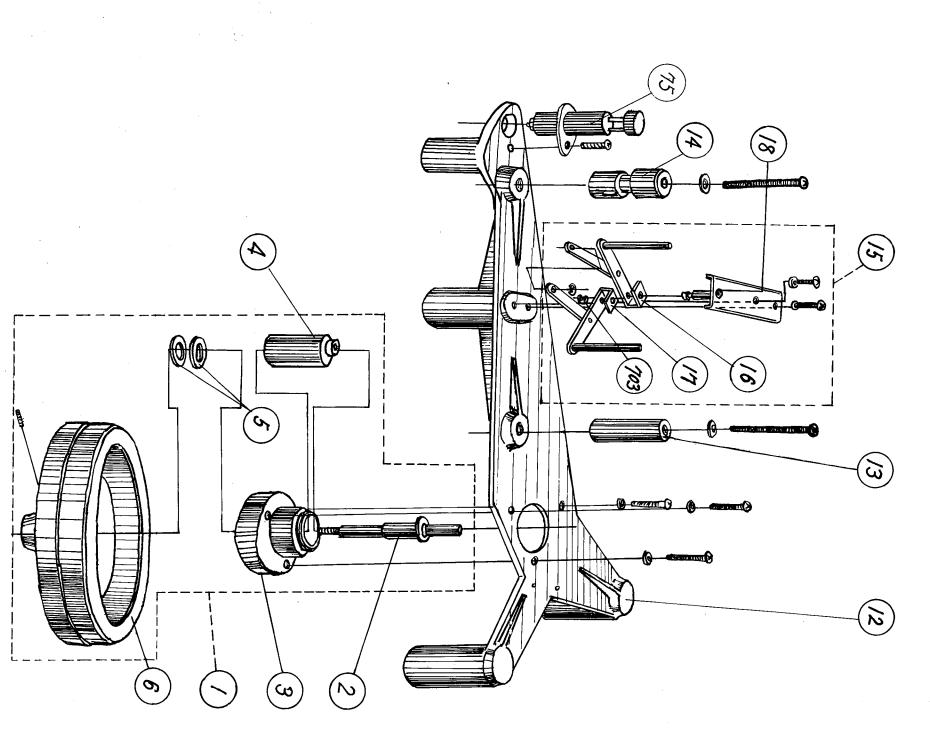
CAPSTAN ASS'Y, EXPLODED VIEW
